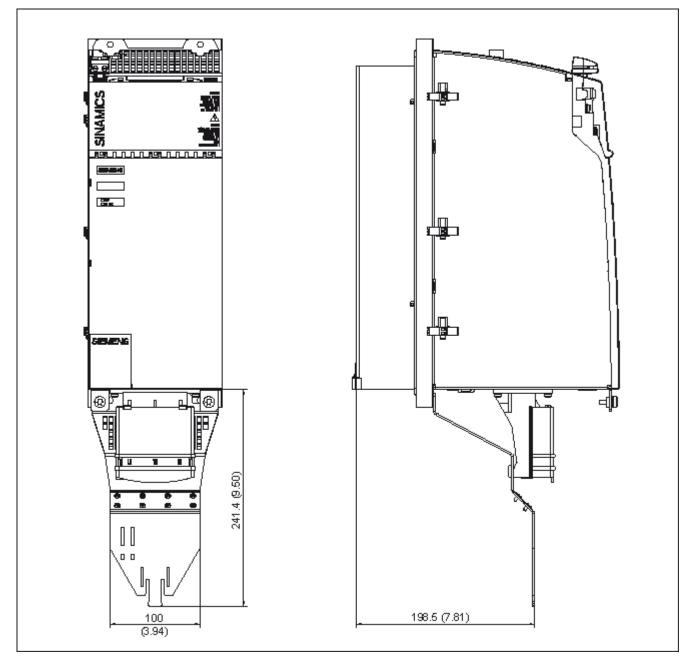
Dimension drawing of shield connecting plate on a 150 mm component with external air cooling, all dimensions in mm and (inches)
